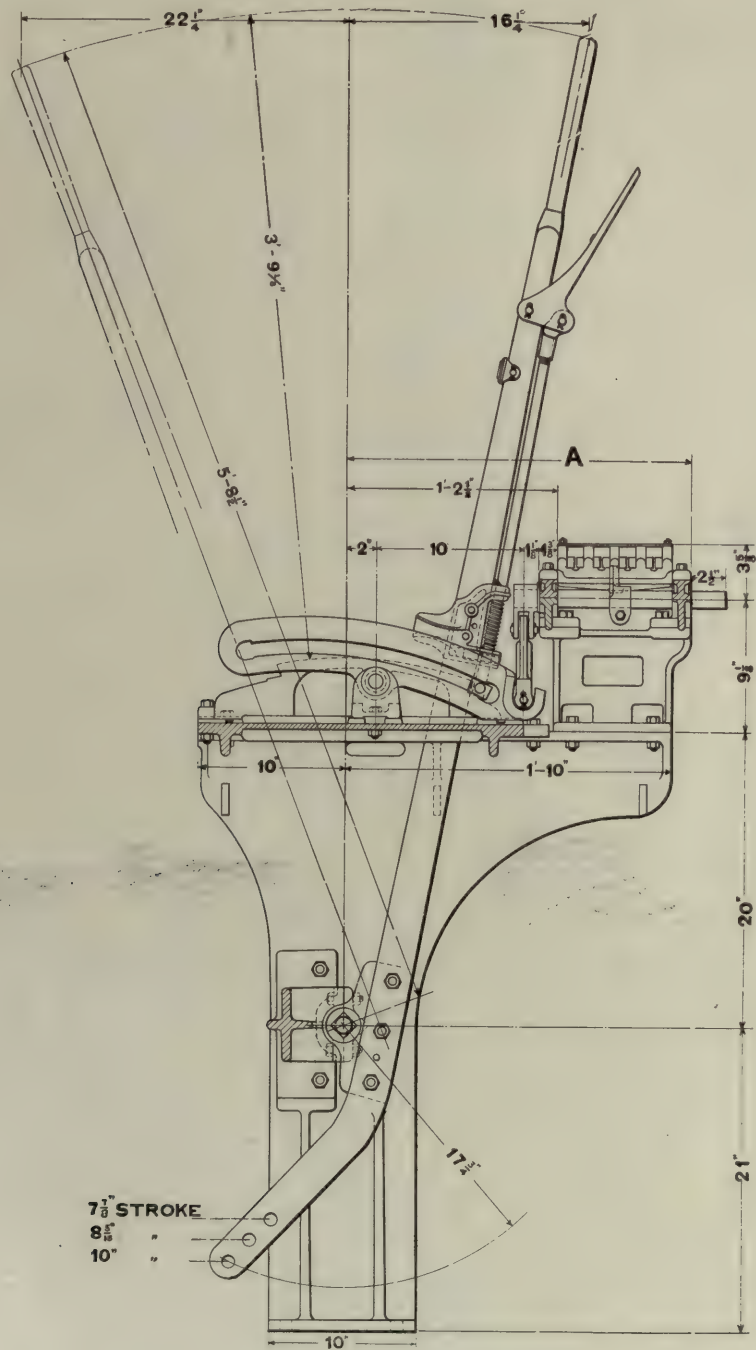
Outline of the Saxby & Farmer Interlocking Machine; Arranged for Horizontal Leadout.
